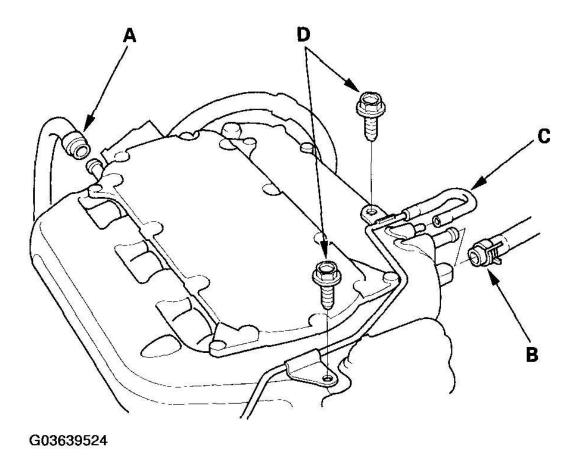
Removing Positive Crankcase Ventilation Hose Courtesy of AMERICAN HONDA MOTOR CO., INC.
